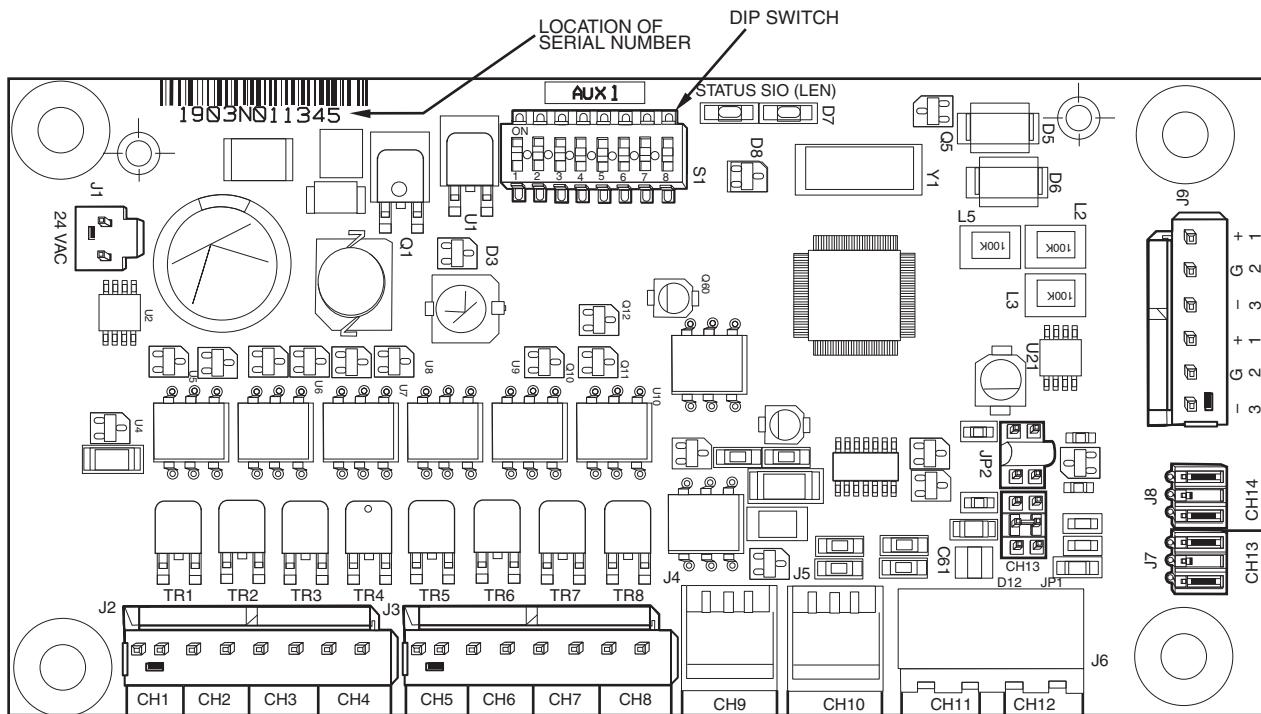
Auxiliary Board with Optional Minimum Load Control or Head Pressure Control
